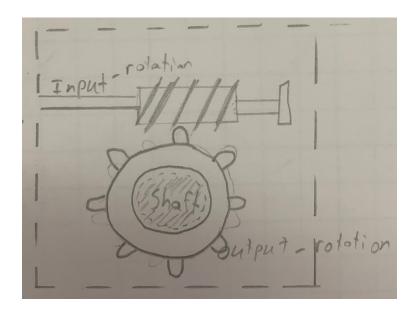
Worm gear mechanism producing rotational output to move the lead screw.
